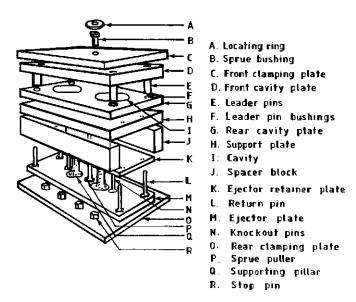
Exploded view of a six-plate mold base. (From Weir, C.L., Introduction to Molding, Society of Plastics Engineers, CT, 1975. With permission.)
